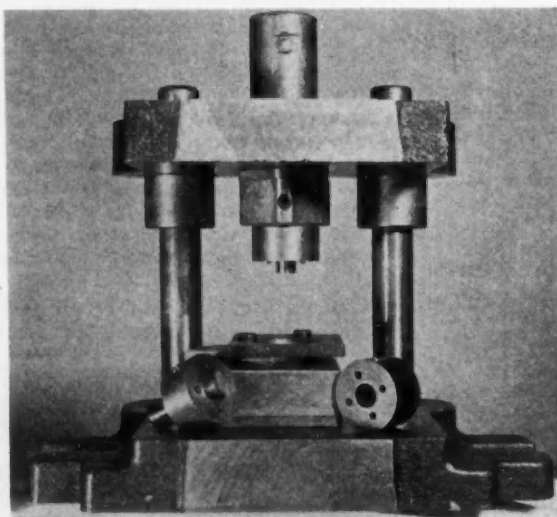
Making possible the welding of common square nuts to sheet metal was this punch and die set, which dimpled the work piece while also punching the bolt clearance hole
